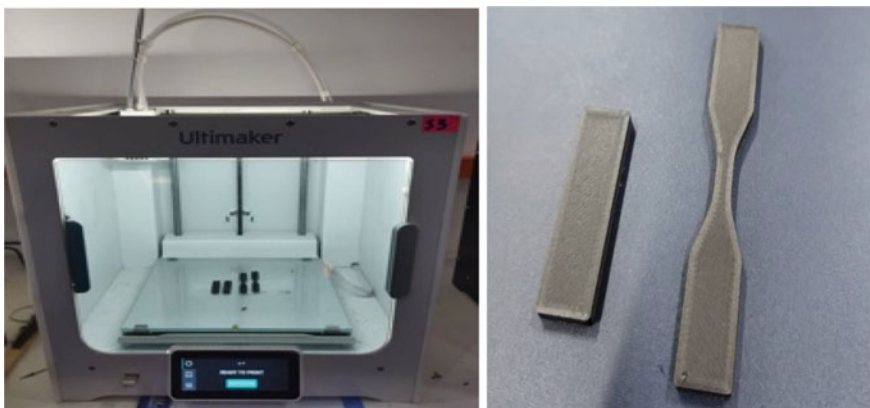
Ultimaker S3 3D printer (left) and 3D-printed PLA-carbon fibre (15%) DMA sample and tensile testing sample using Ultimaker S3
